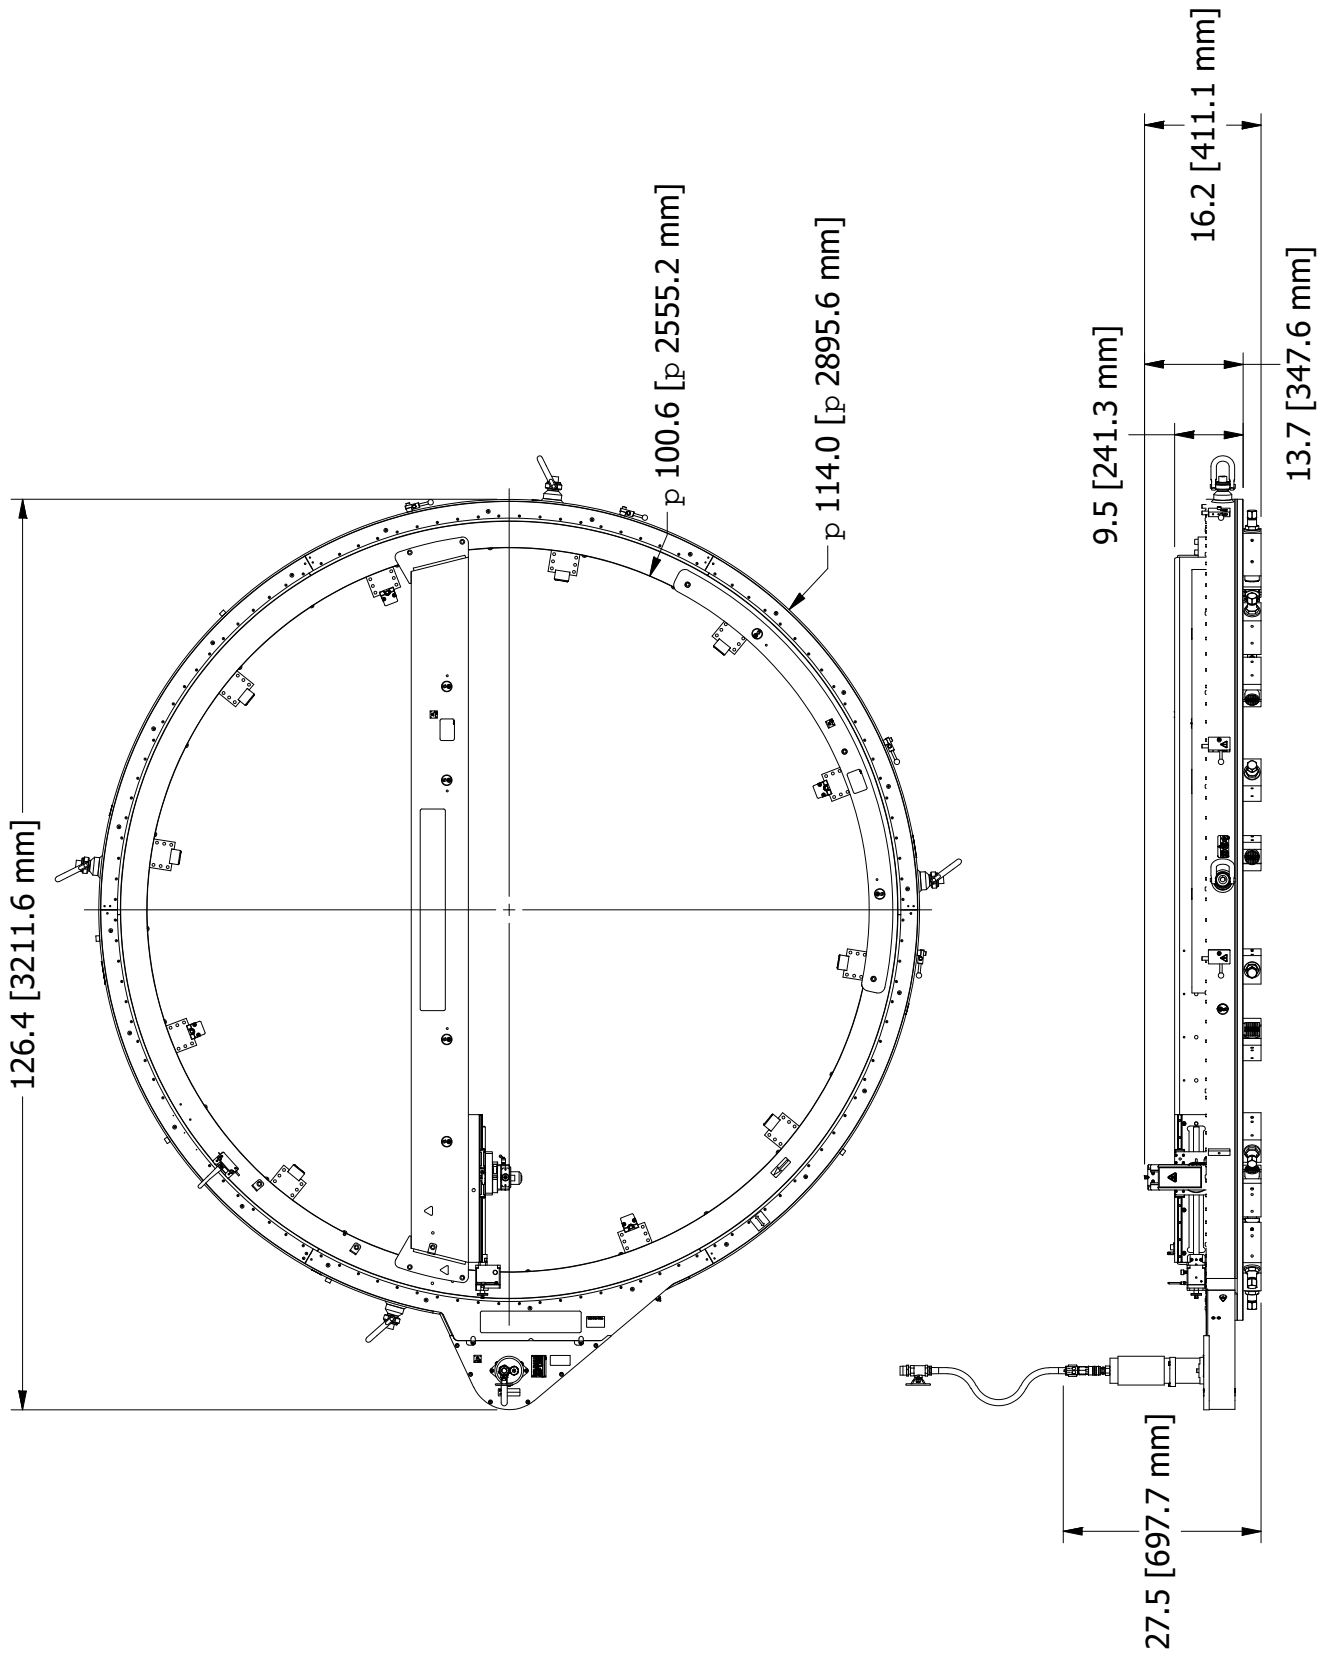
ODF100 SPEED FACER DIMENSIONS (P/N 94790)
